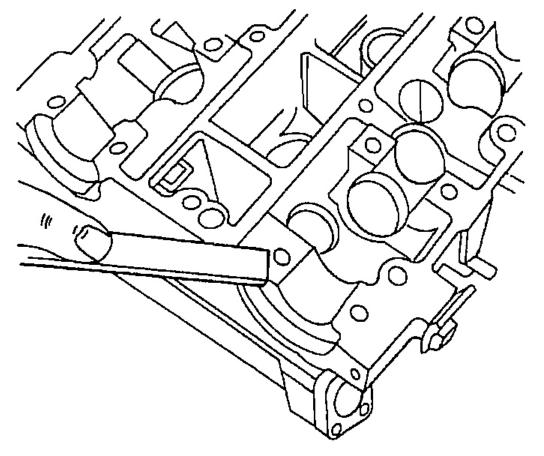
Identifying Valve Courtesy of SUZUKI OF AMERICA CORP.
